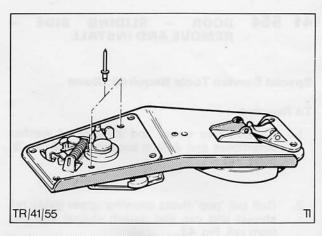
'Pop' rivet location, lock assembly to lockplate
